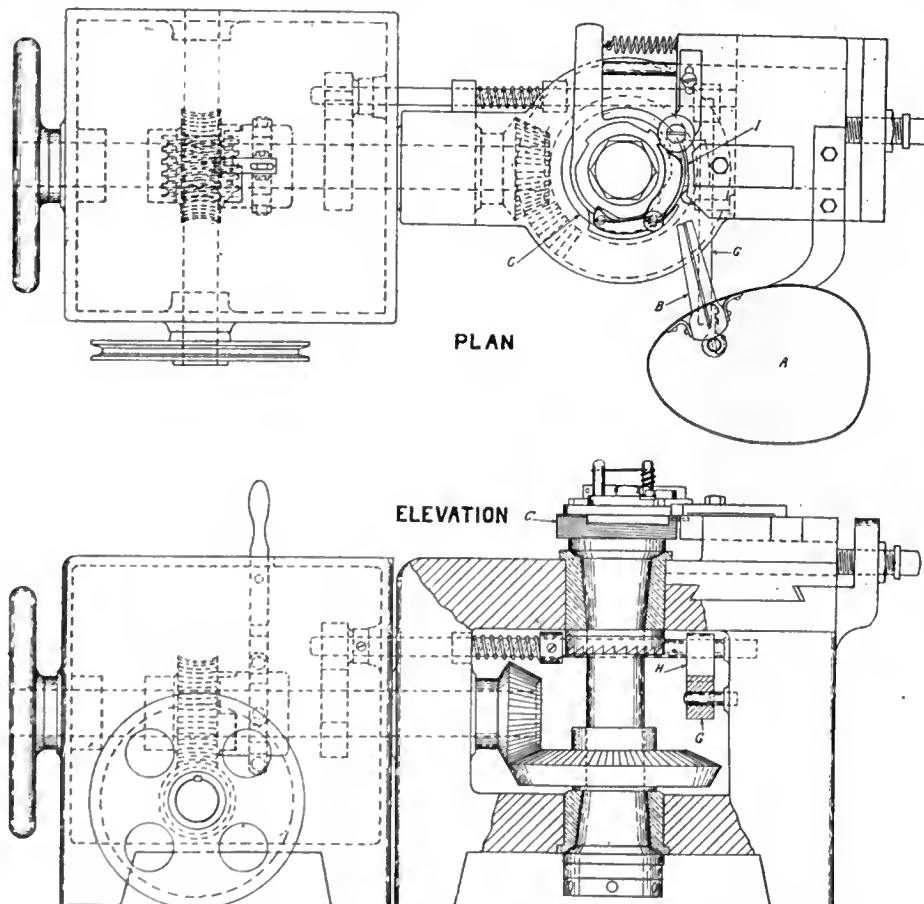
GENERAL ARRANGEMENT OF THREAD ROLLING MACHINE
